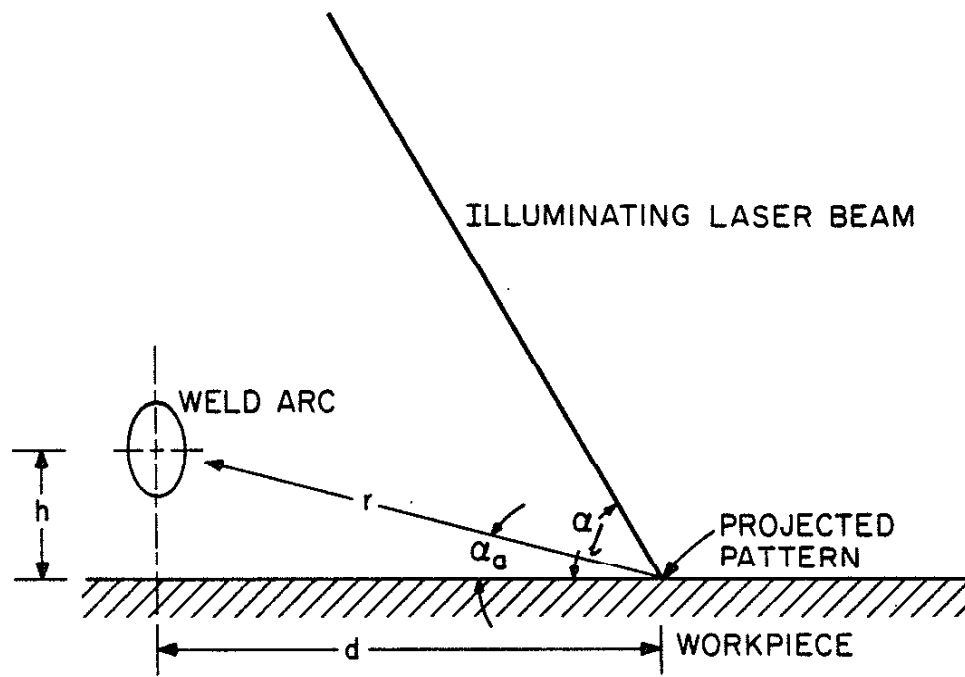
Arrangement of the weld arc and workpiece surface.
